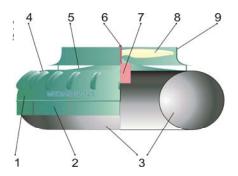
UAV components, [1] *1 - curved upper cap; 2 - steering flaps; 3 - toroidal He chamber; 4 - counter-rotating fins; 5 - inner exhaust profiled cap; 6 - propeller's shaft; 7 - electrical motor and batteries; 8 - propeller; 9 - nozzle
